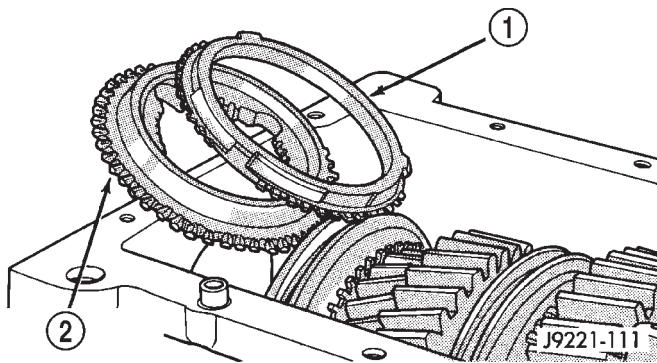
Fourth Gear Clutch Gear Stop Ring
